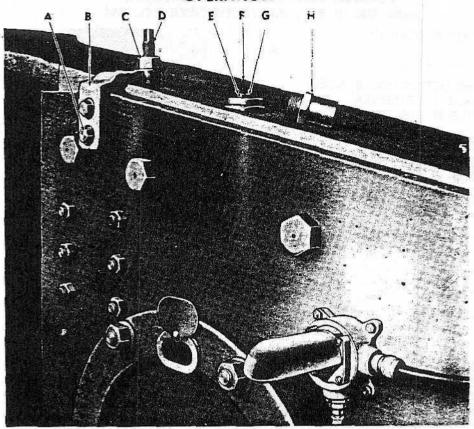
Elevating Brake Band Clearance (Brake Levers Up)
